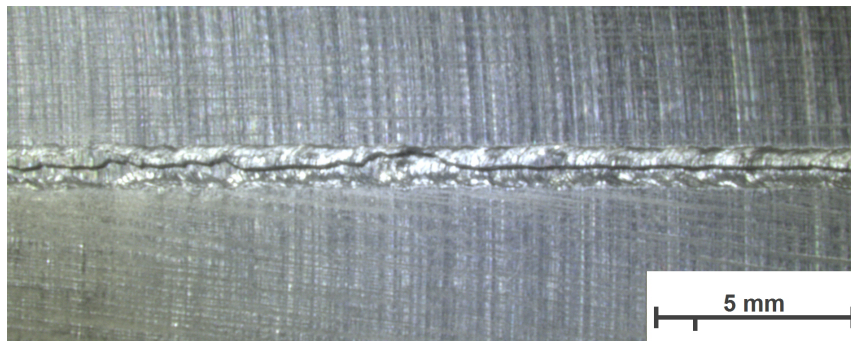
Crack along the fusion zone in weld VII ($I = 15$ mA, $v = 30$ mm/s).
